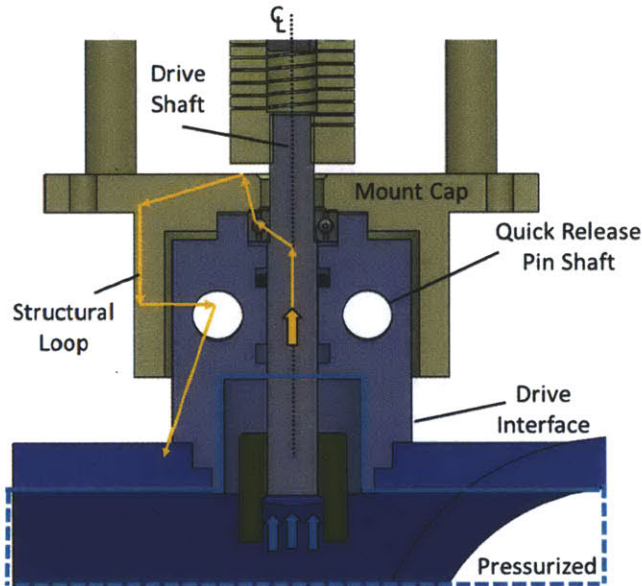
Thrust load structural loop going through shaft, bearing, mount cap, and drive interface port
